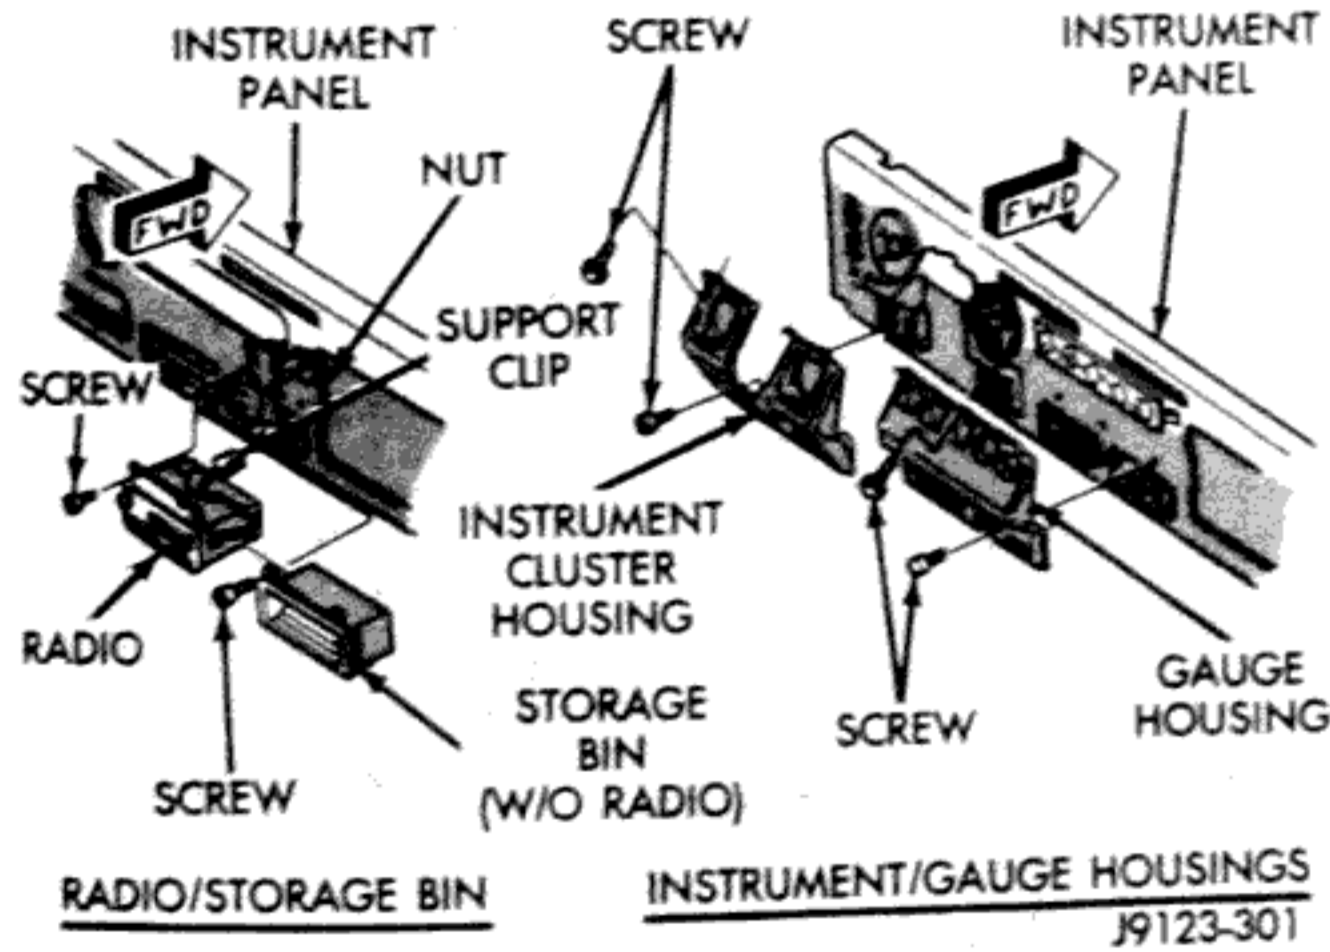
Instrument Cluster/Gauge Housing and Radio
